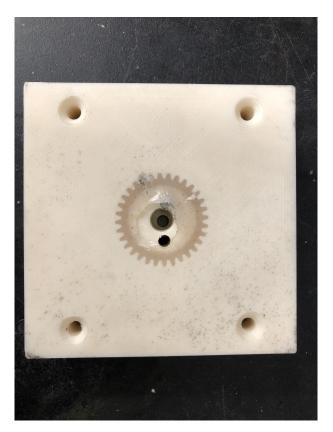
ABS mold after attempting to remove completed part using pins.
